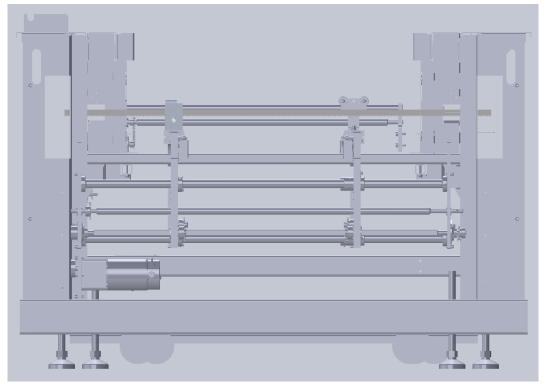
Front view of rack and pinion modules in oven, with racks in tan. This view shows how the bottom of the pinion housing is attached to the EHC rail.
